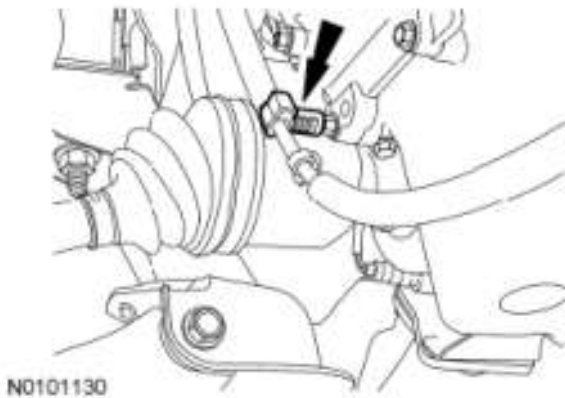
Locating Transaxle Selector Lever Cable Fastener
